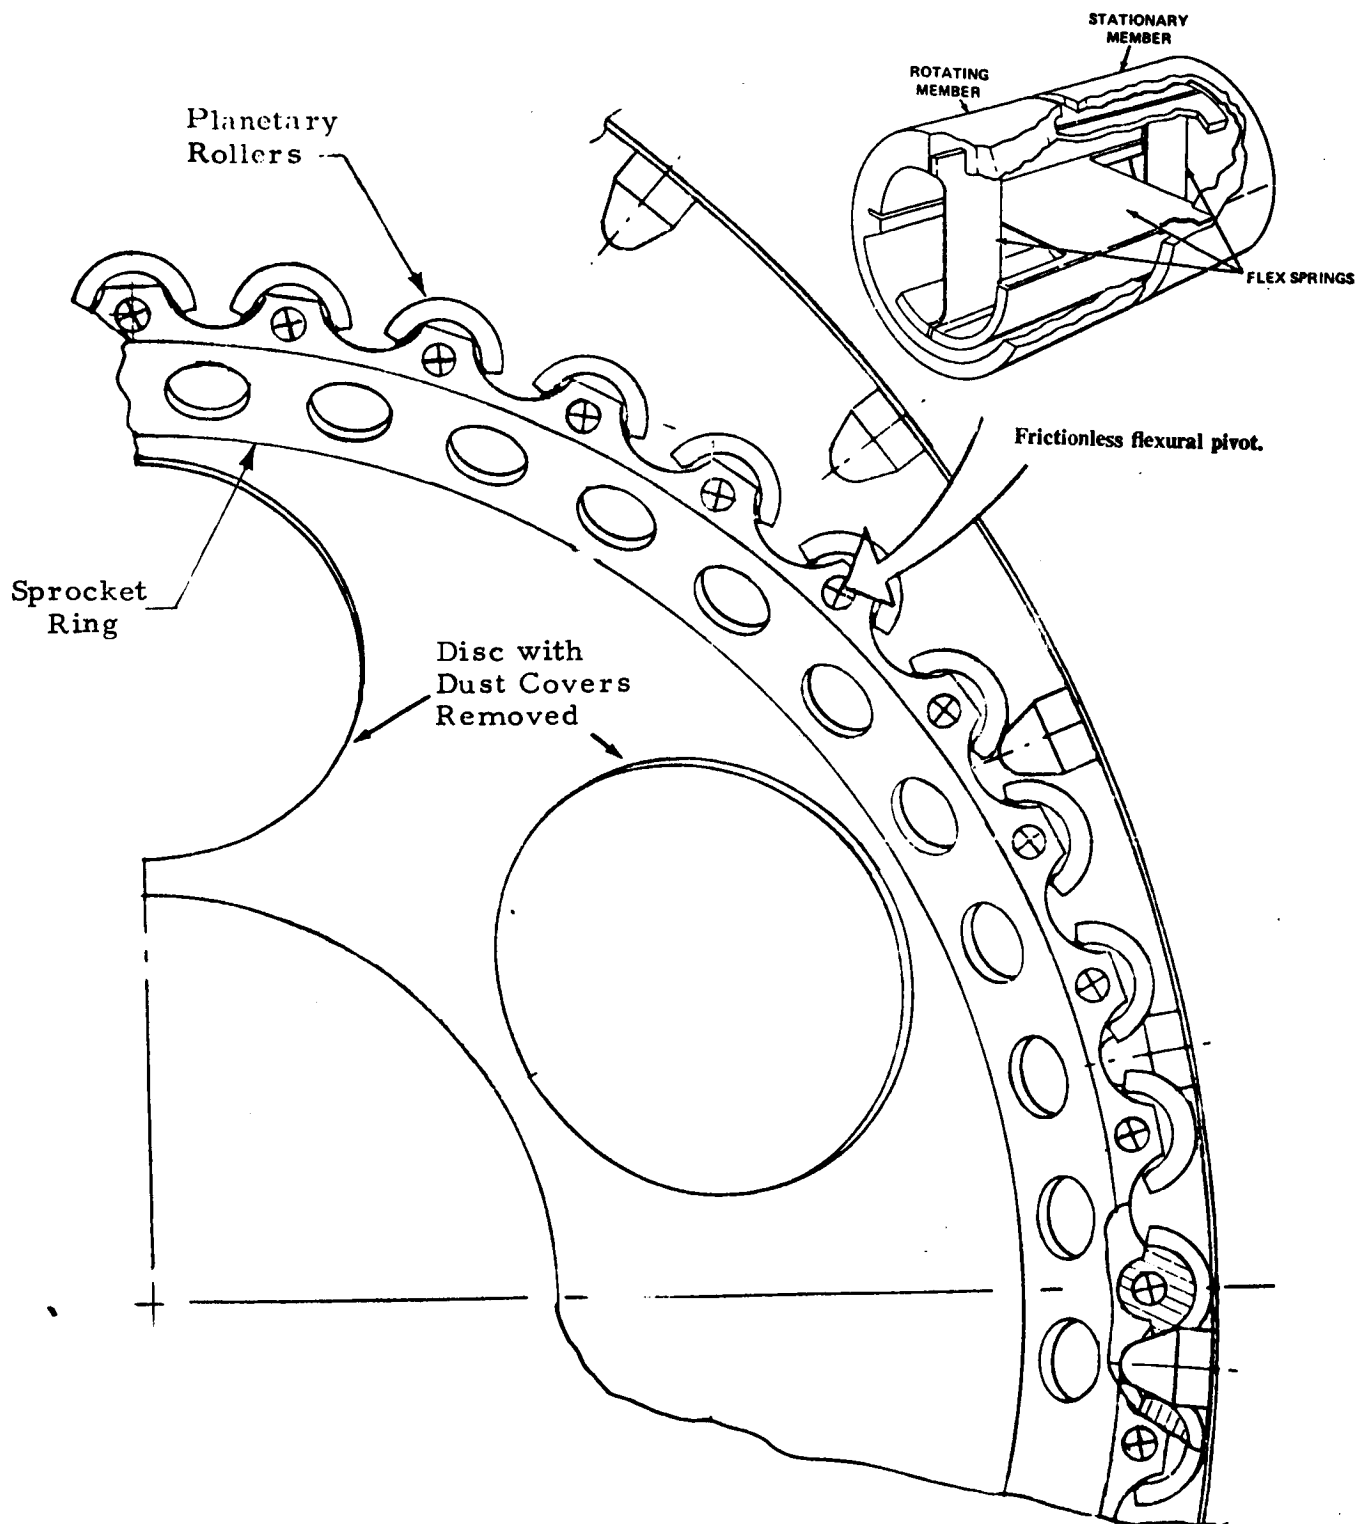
Sideview of Drive Drum, Planetary Rollers and Flexural Pivots for Frictionless Mounting of Rollers
